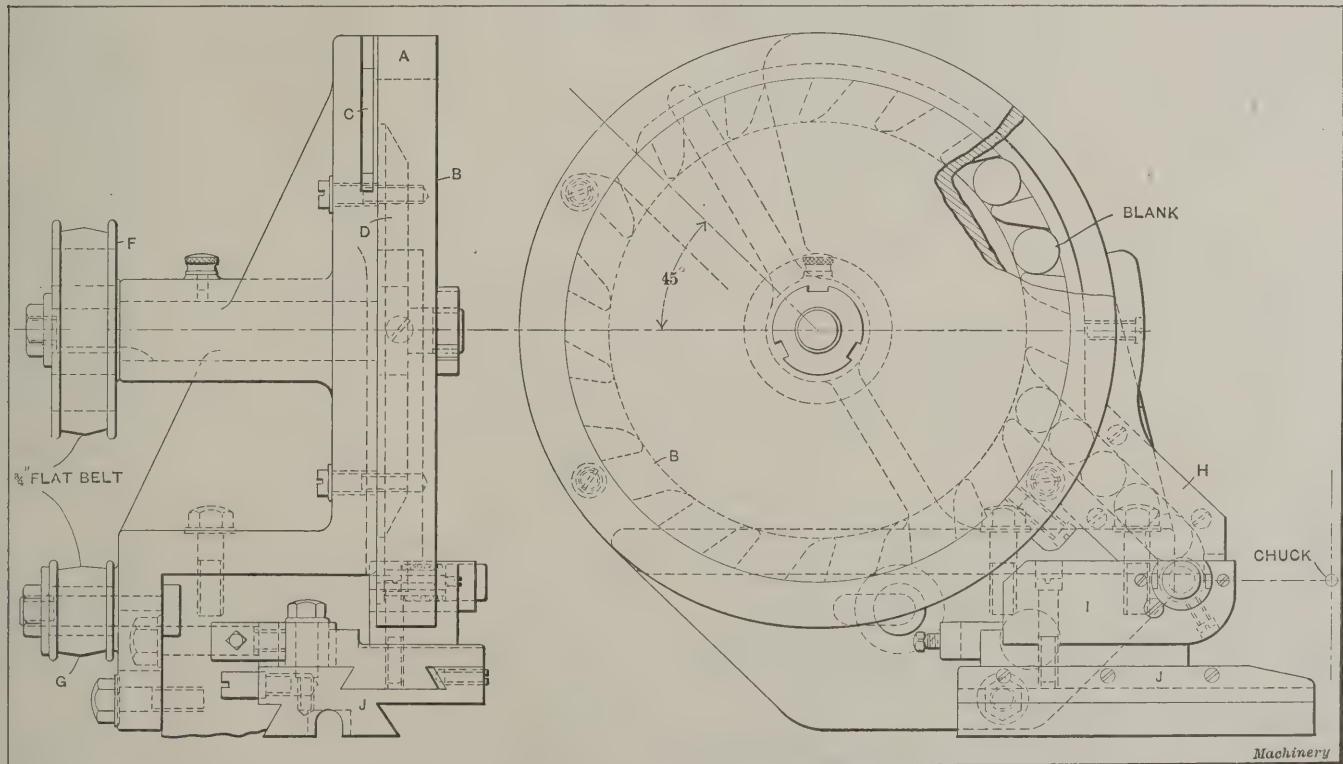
Assembly Views of Magazine Attachment shown in Fig. 13
